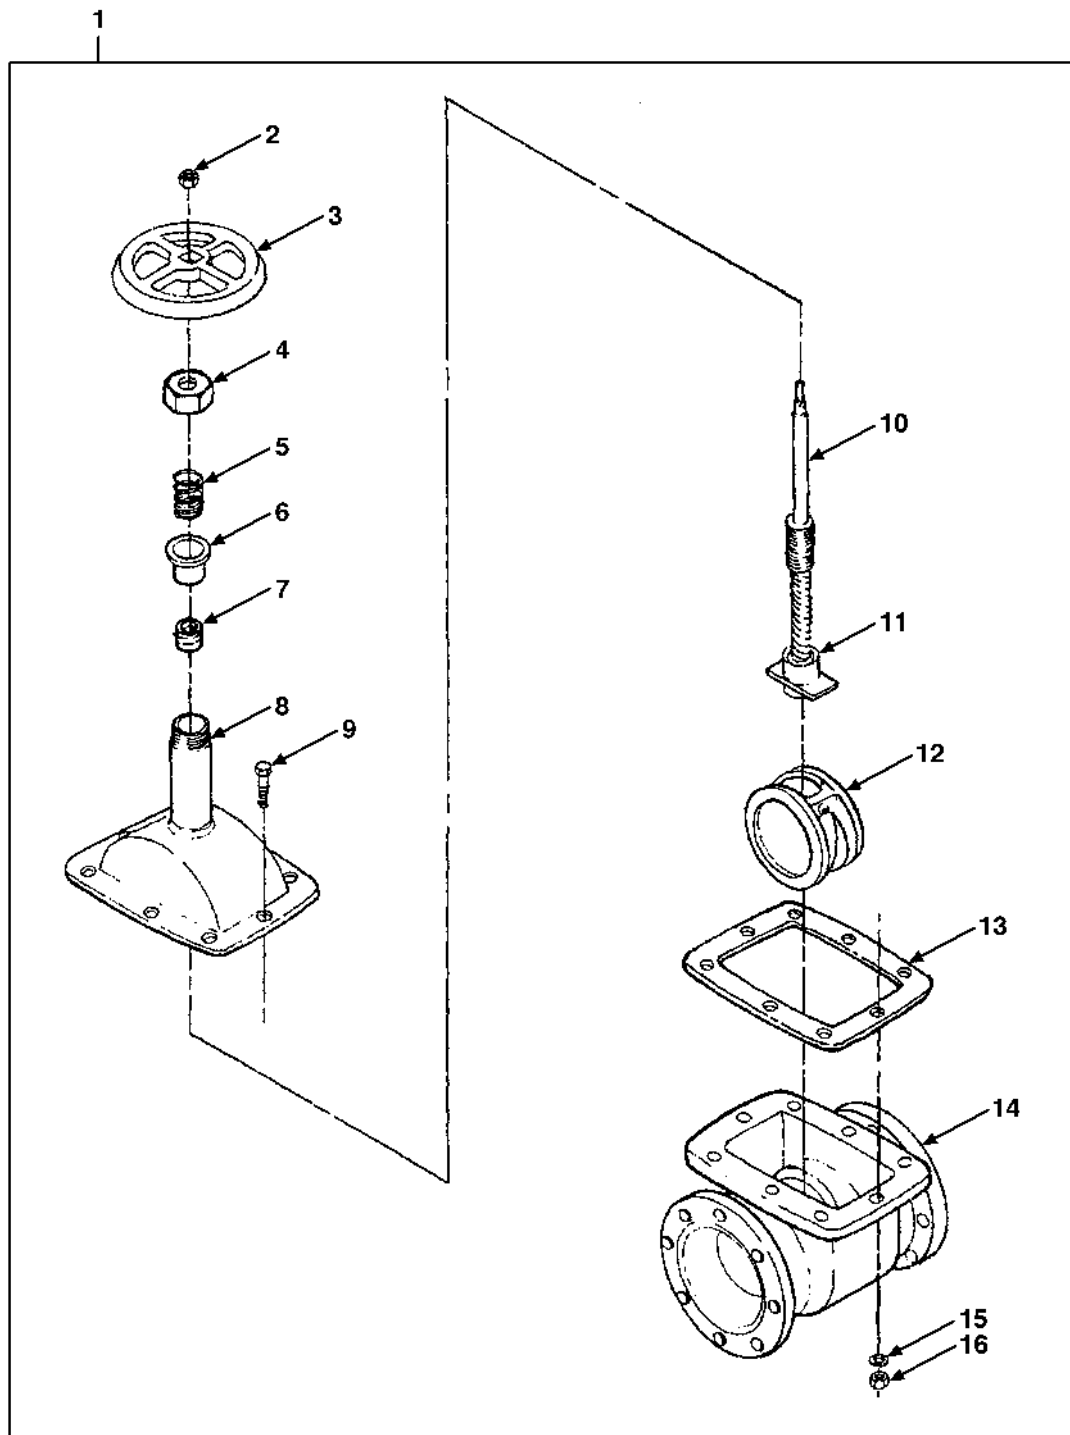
VALVE ASSEMBLY, "B, E, AND F"
